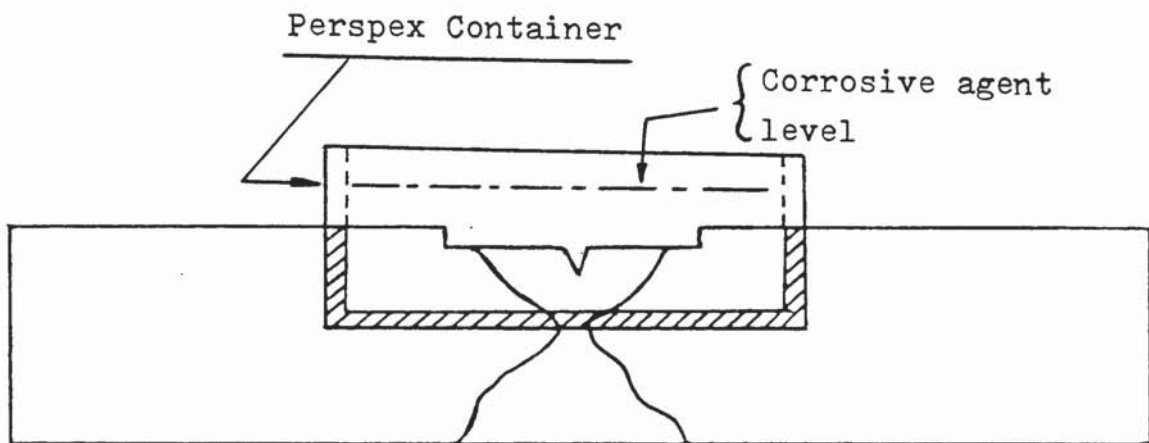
Schematic representation of arrangement used for the propagation of corrosion-fatigue cracks in austenitic weldments.
